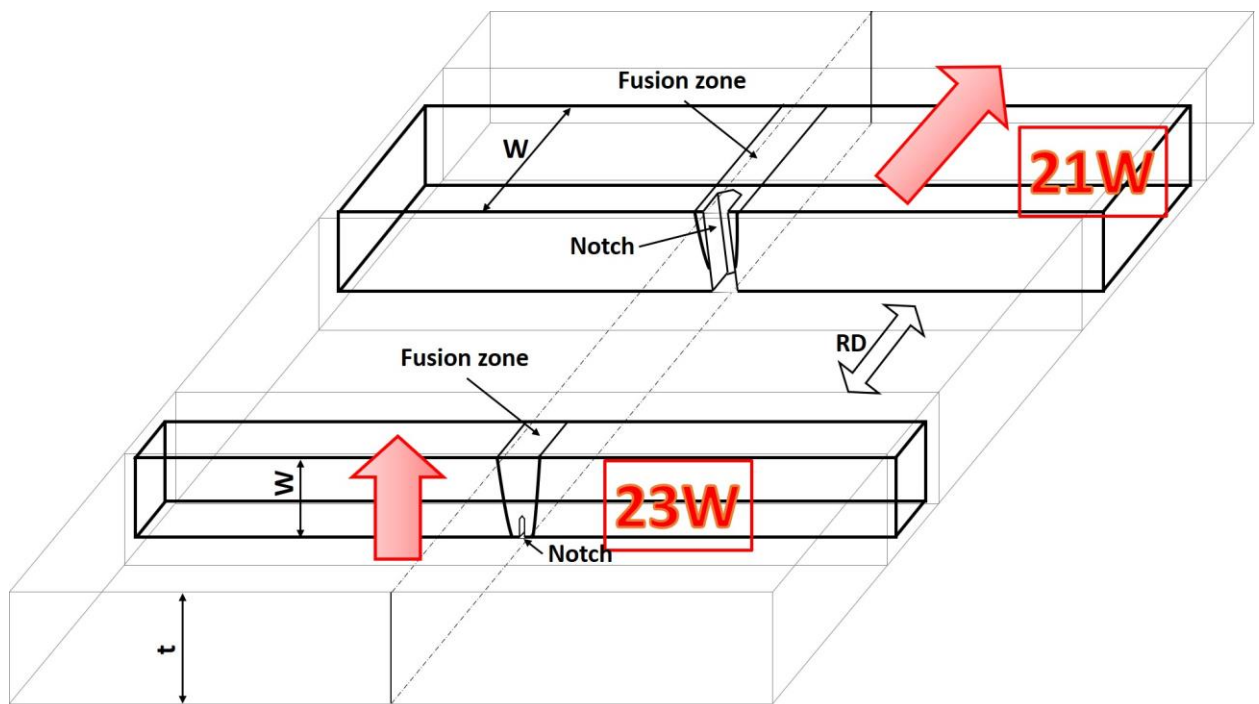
TPB specimen locations in welded joint with notch directions (RD = rolling direction) [14][139][175].
